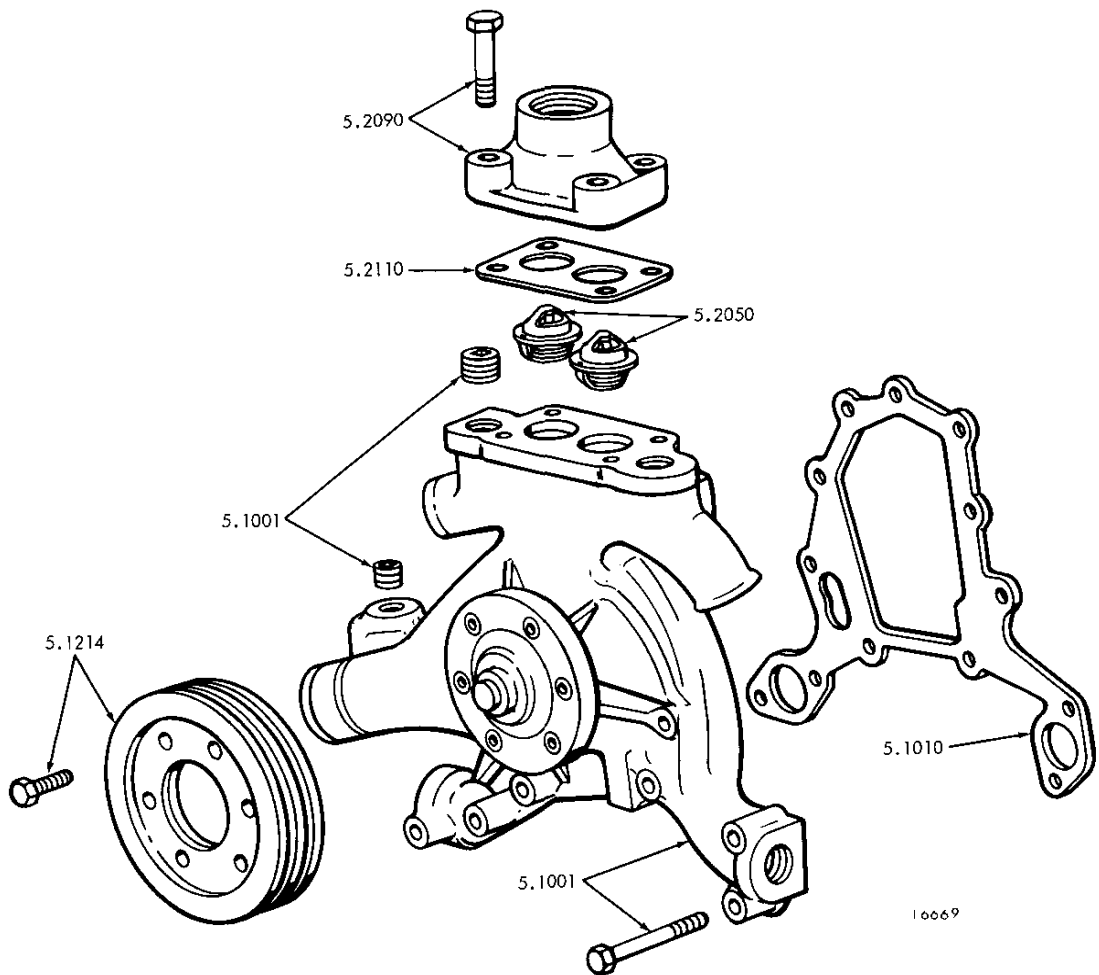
A FRESH WATER PUMP ASSEMBLY, PULLEY AND THERMOSTATS
